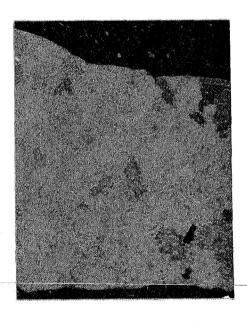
Specimen No. 1, fracture plane. 8 X.
